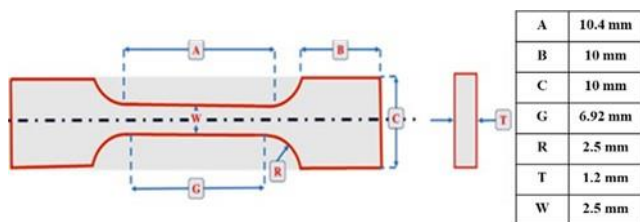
Dimensions of tensile test specimens used according to JIS Z2201
